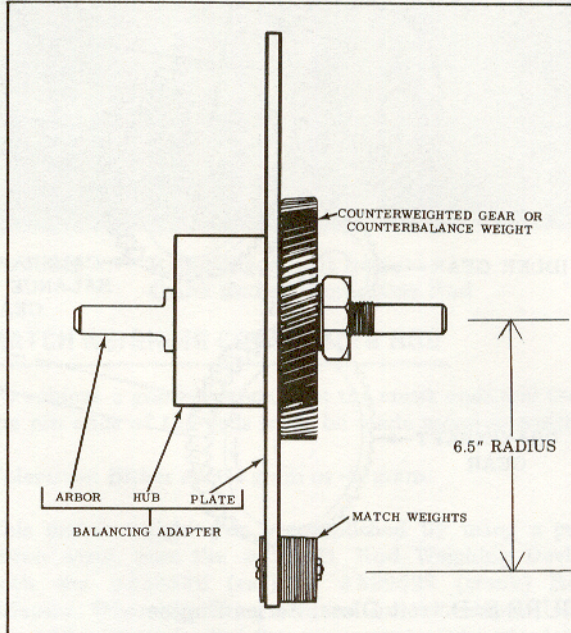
Counterweighted Gear and Matchweights on Balancing Fixture
